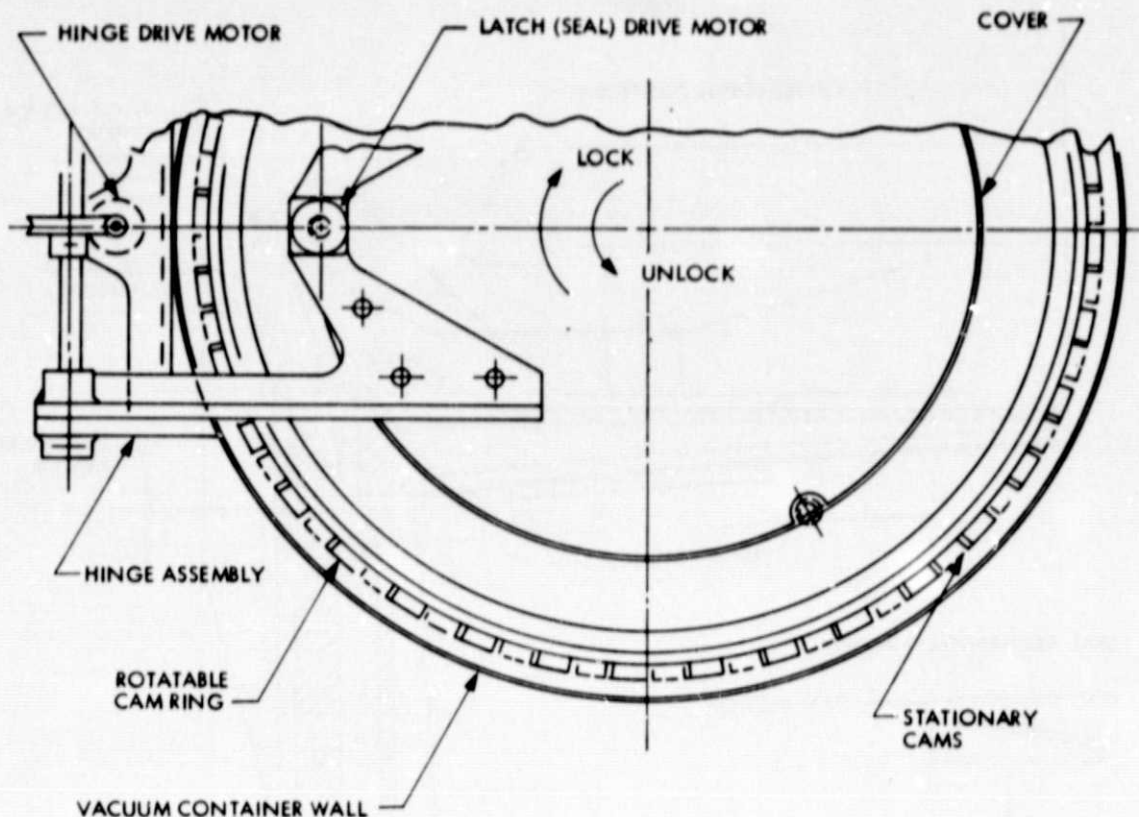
Aft seal and hinge assembly (front seal employs the same principle)
